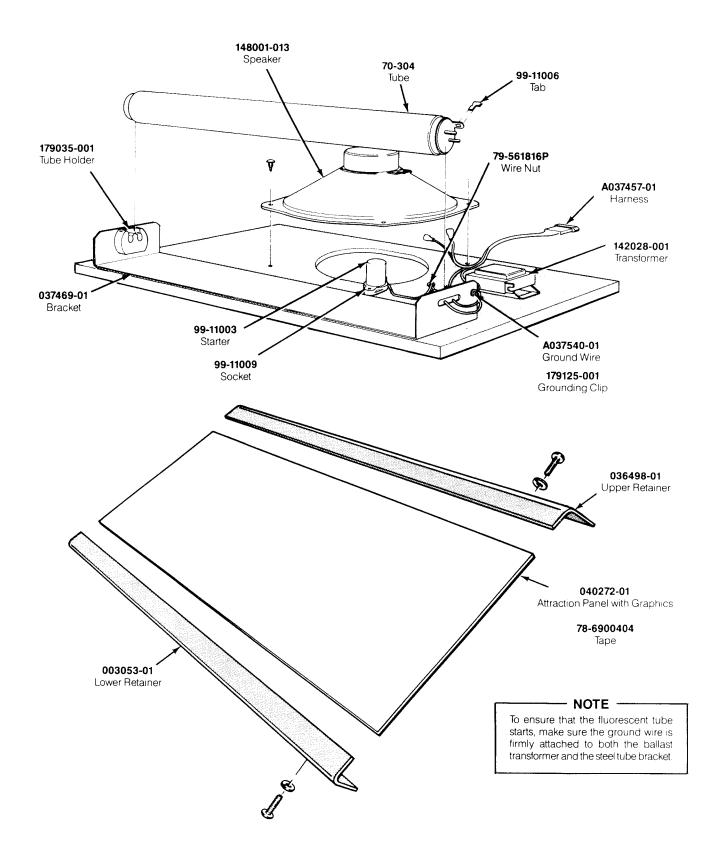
Fluorescent Tube and Speaker Assembly A039737-01 B
